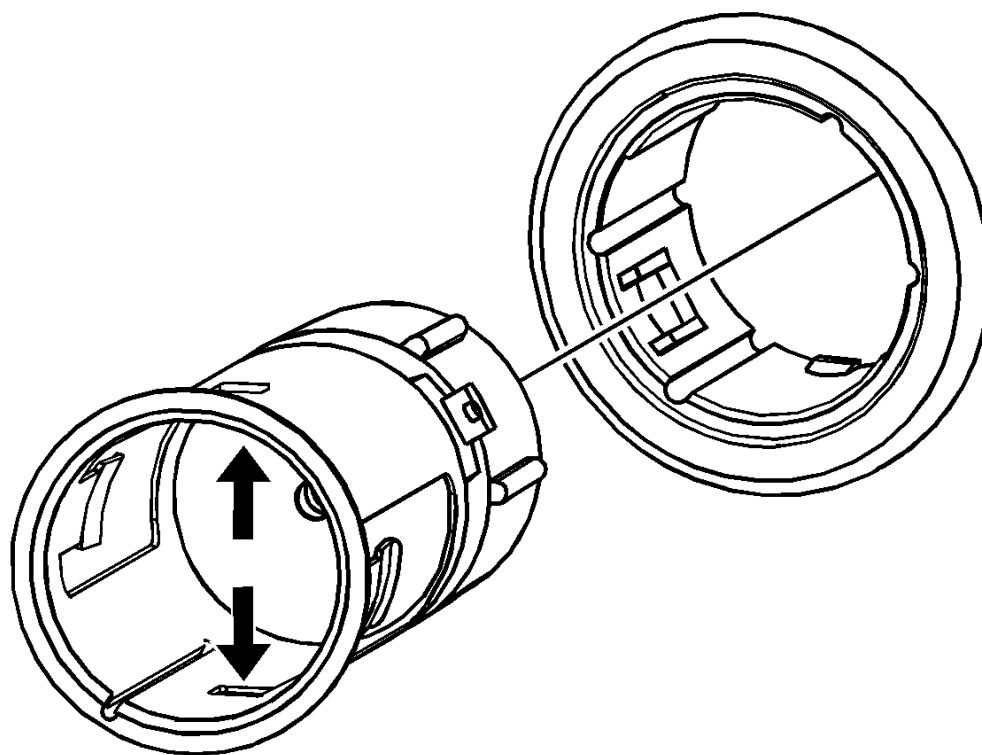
View Of Cigar Lighter Socket/Accessory Power Outlet
